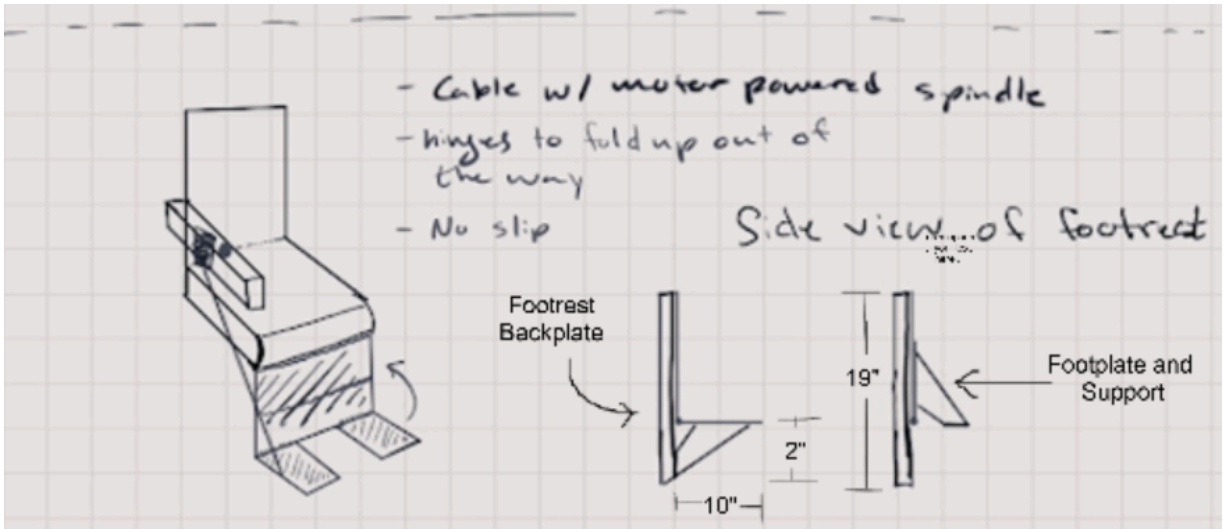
Hand Crank Panel Footrest Initial Design and Collapsing Mechanism
